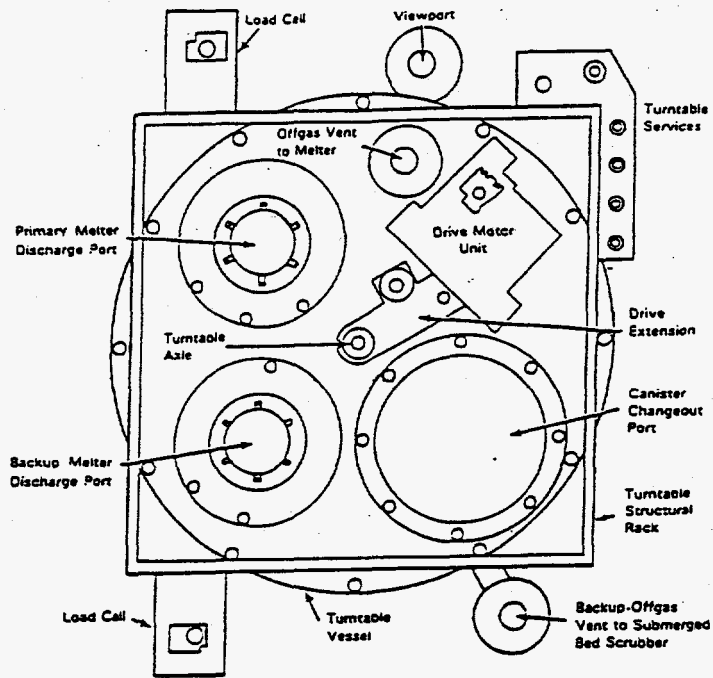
Glass Canister Turntable Assembly, View 2 (Whittington and Peters 1992)
